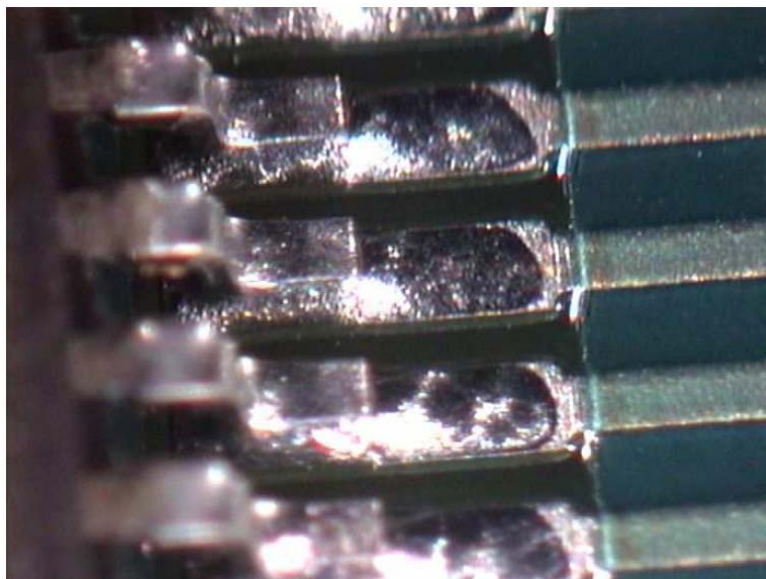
Typical occurrence of PG-TSSOP-38-4 solder joints (Pb-free)
